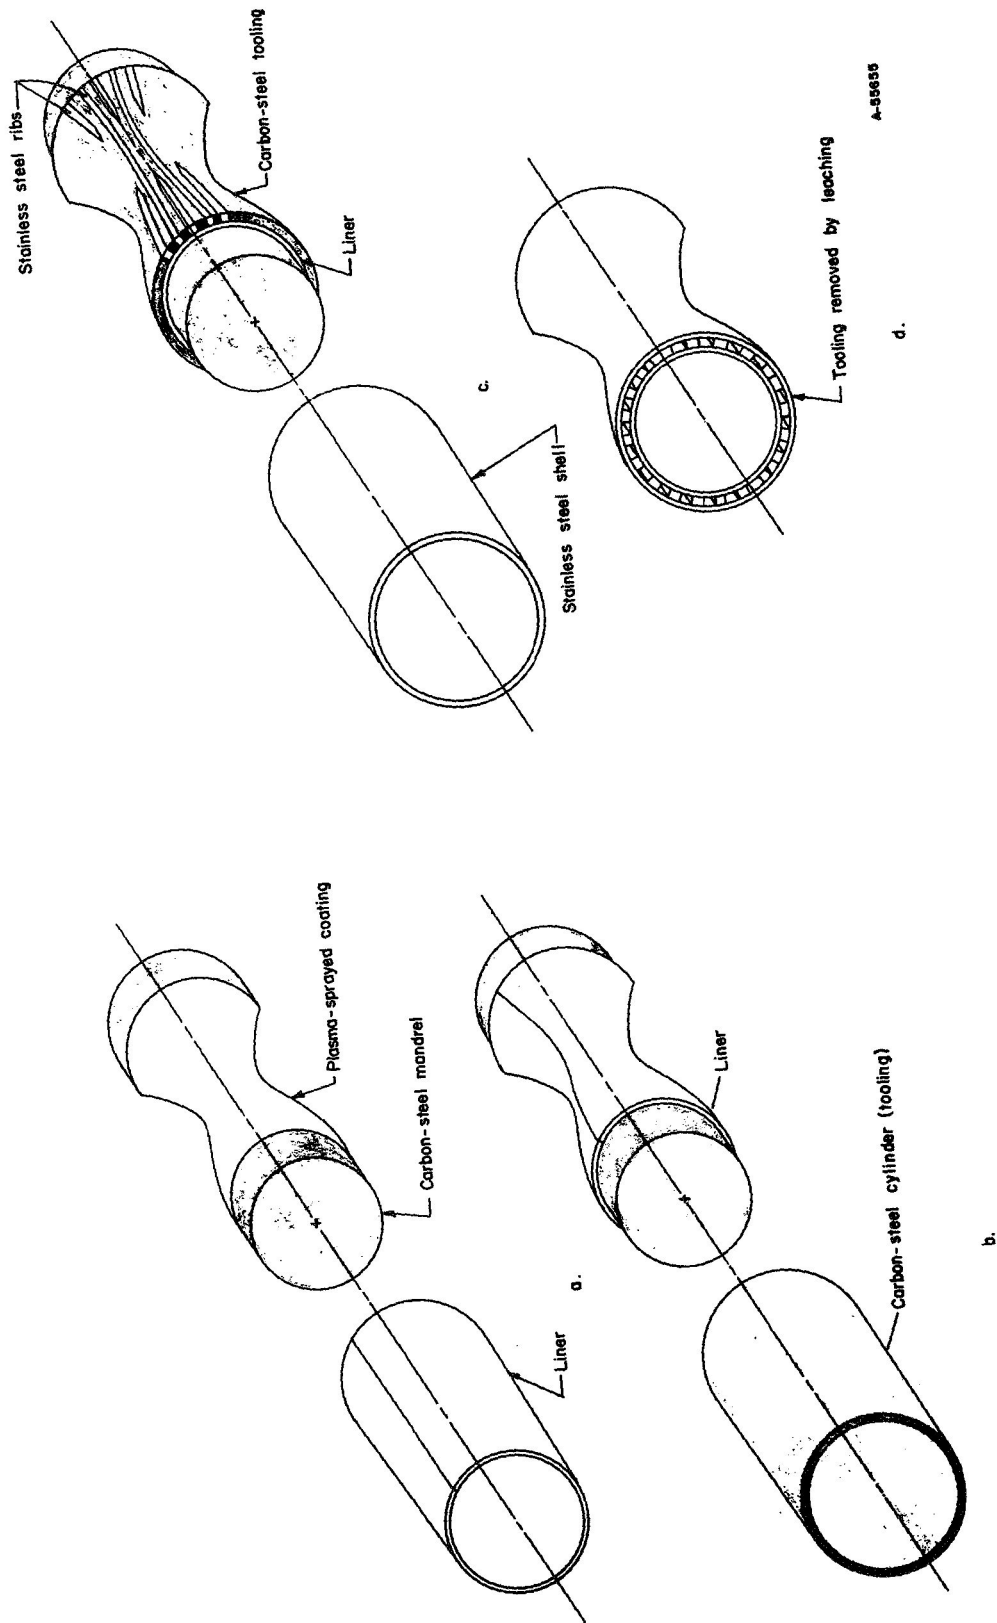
THRUST-CHAMBER ASSEMBLY
